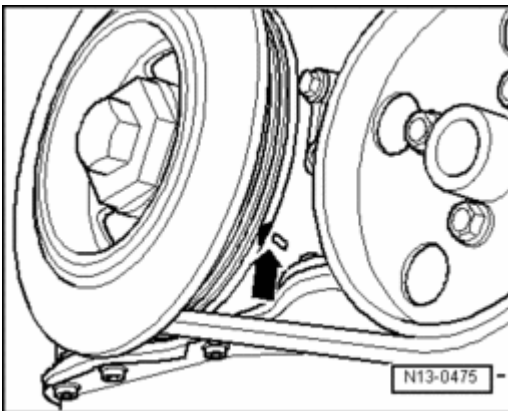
Identifying Crankshaft At Vibration Damper Securing Bolt In Engine At TDC Cyl. 1
